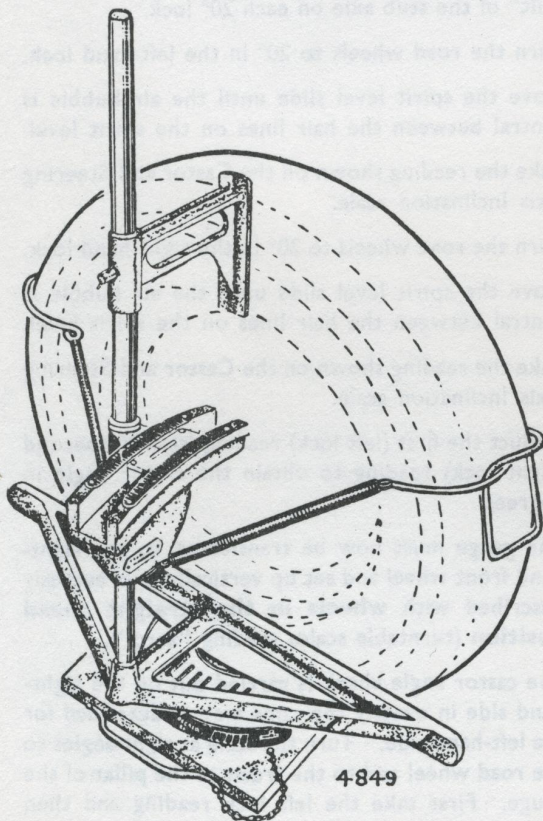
Churchill camber/caster gauge and turntable VLC.121U in position
